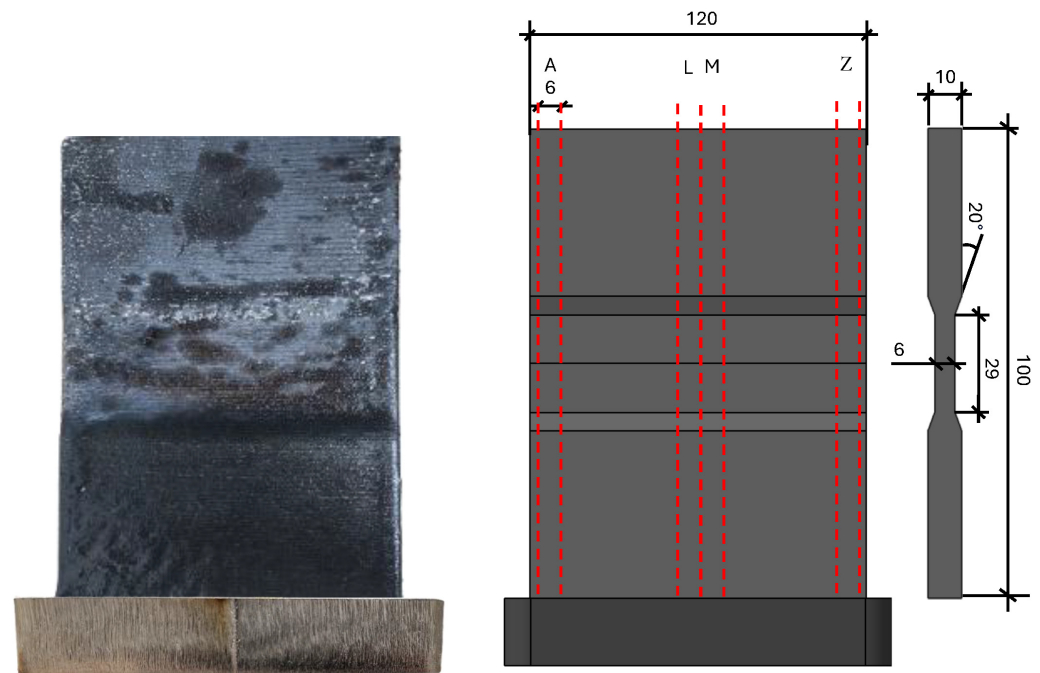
Sample manufactured for extracting specimens with the specified dimensions in the XZ plane.
